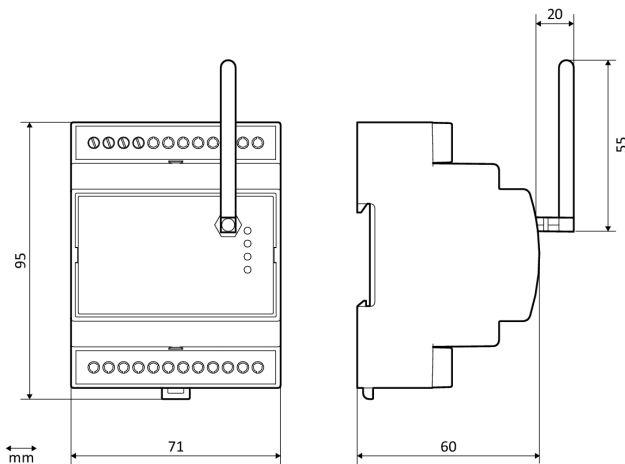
Fig. 1 SIU-MBM-02 dimensions
